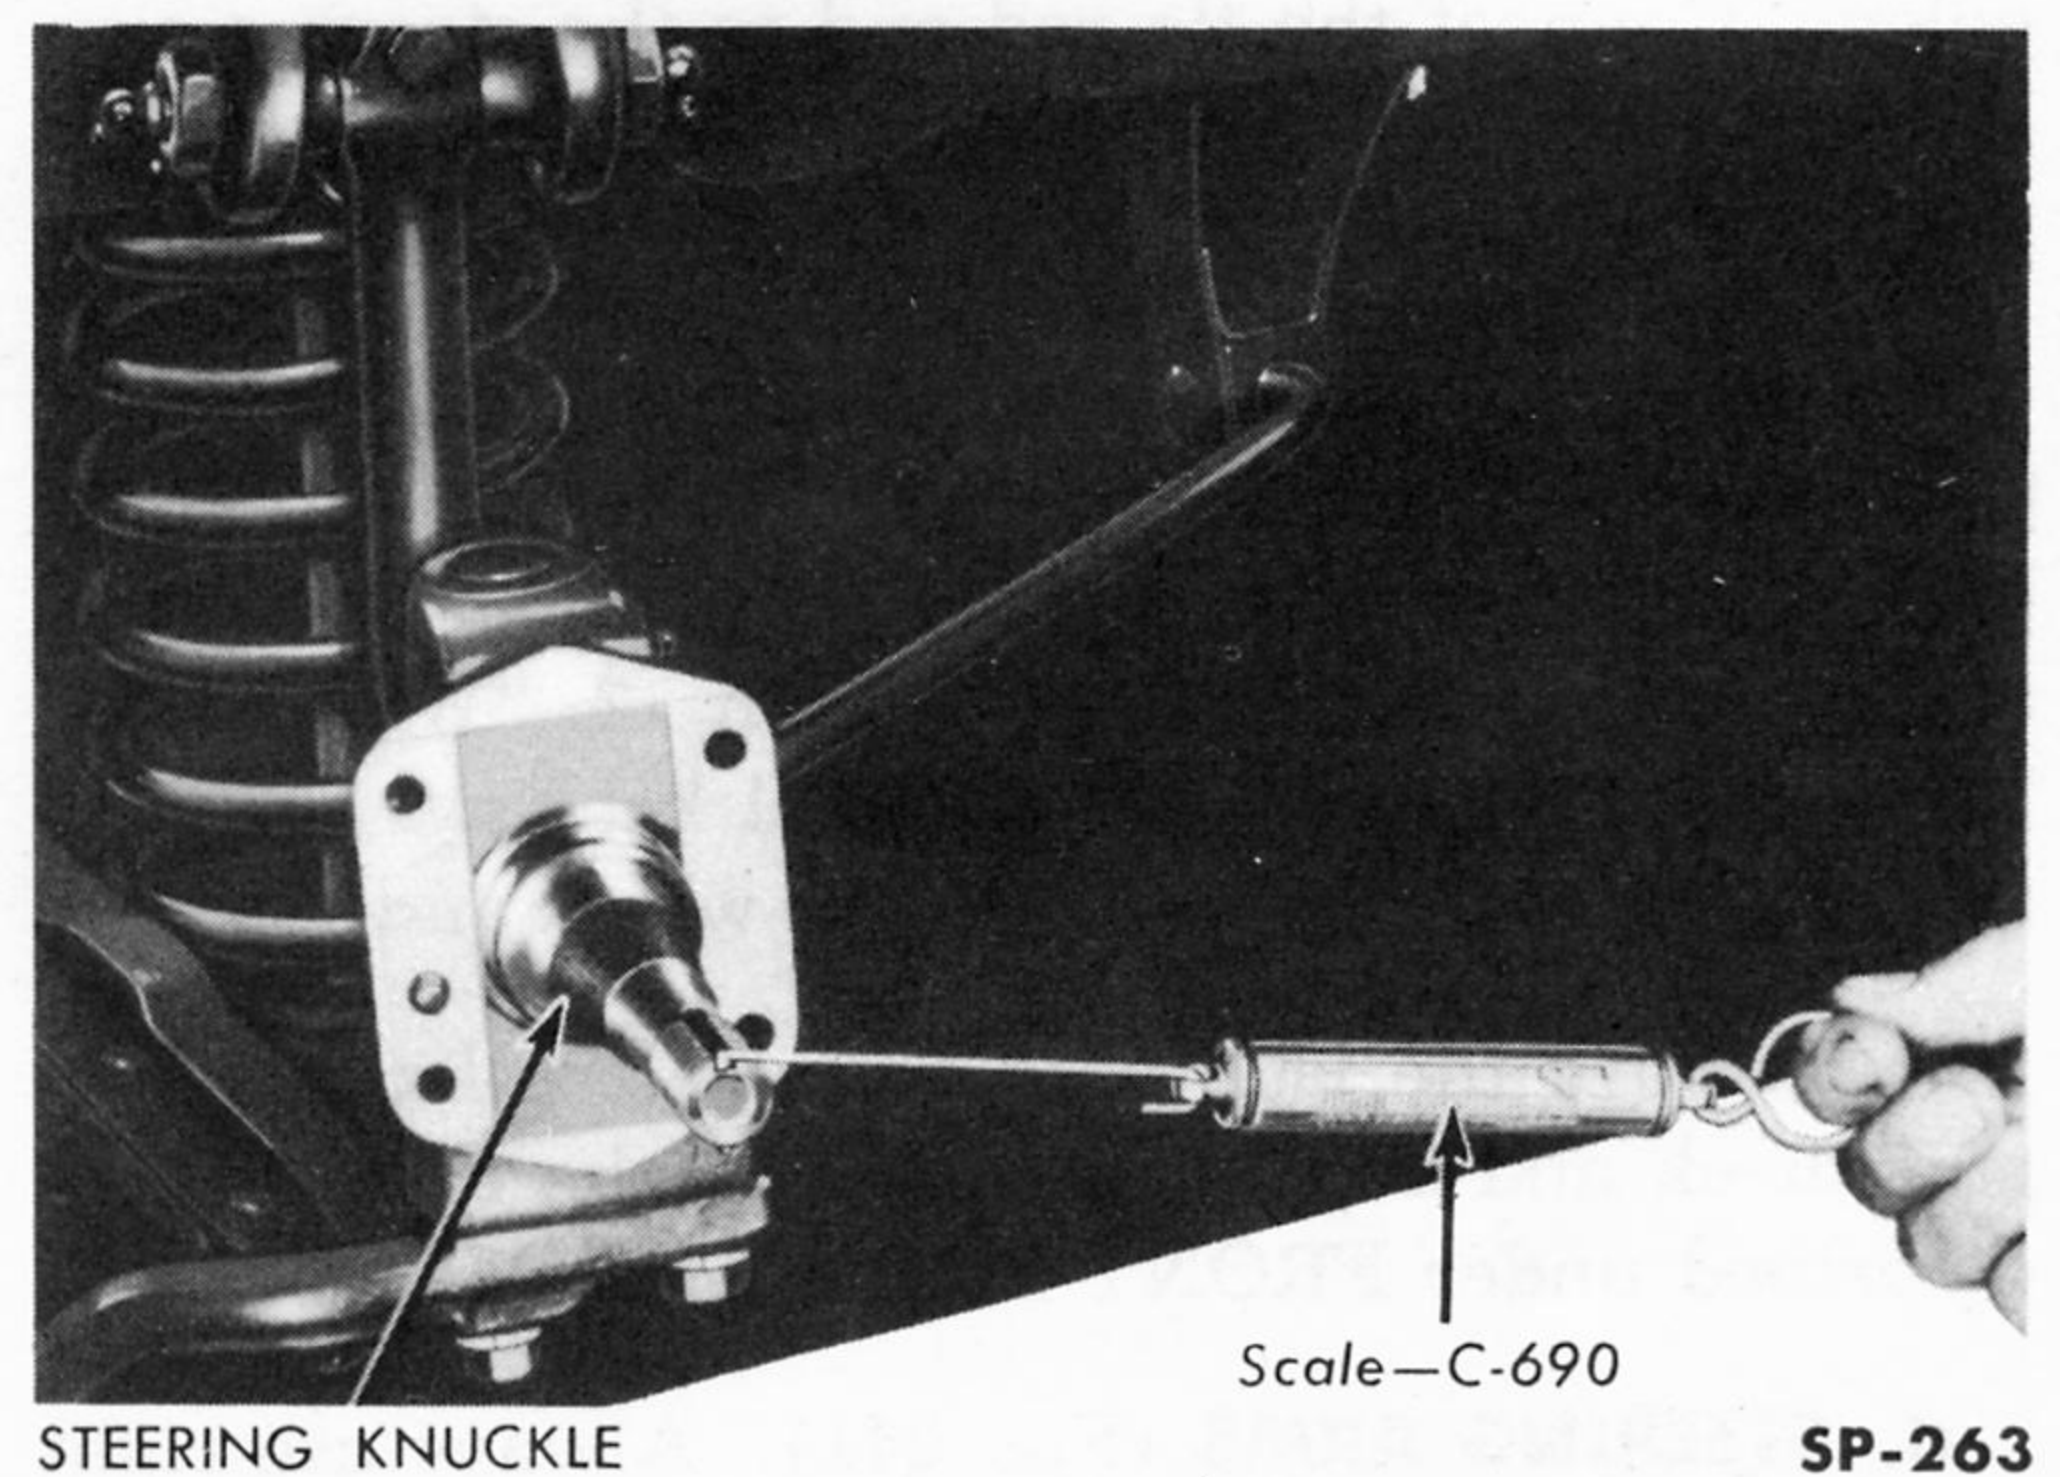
Checking Pull to Determine Fit of Steering Knuckle
